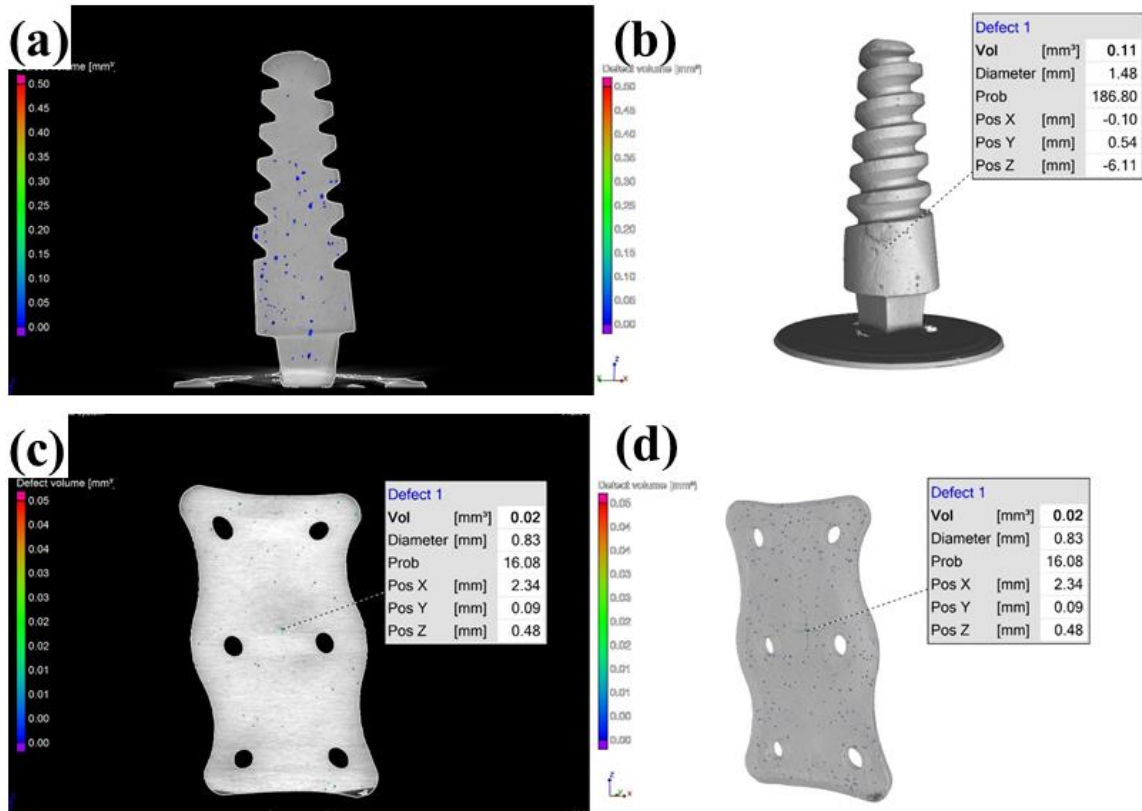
(a) Cross-sectional 2D view of dental root; (b) isometric view of sintered dental root scanned by micro-CT; (c) cross-sectional view of sintered spinal plate; (d) isometric view of sintered spinal plate scanned by micro-CT
